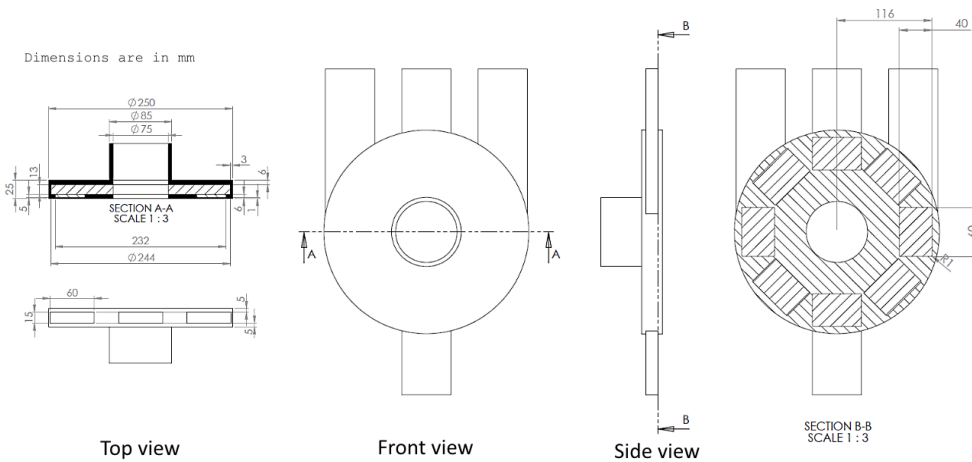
Detail drawing of the 3D CFD model including section A-A and section B-B.
